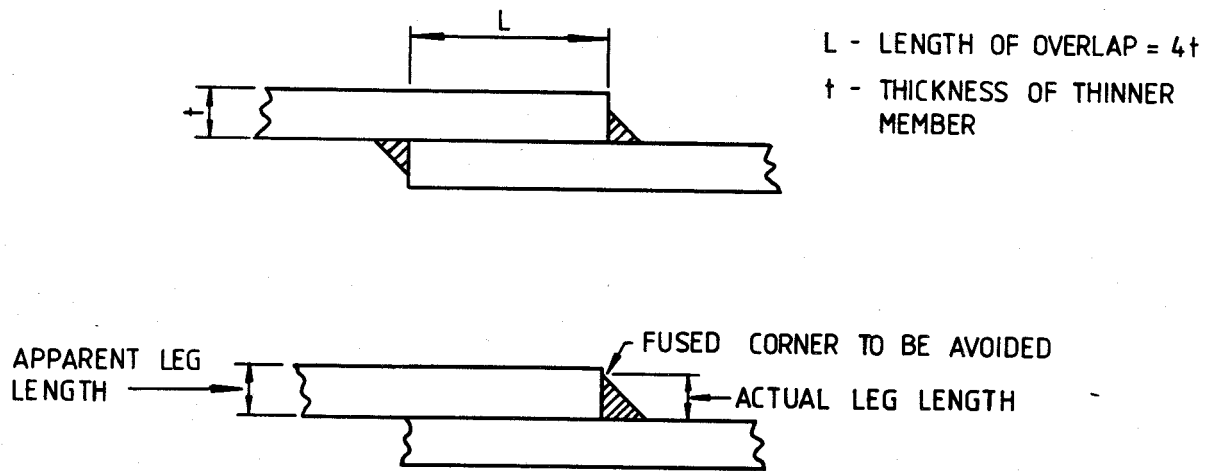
FILLET WELDED LAP JOINTS
